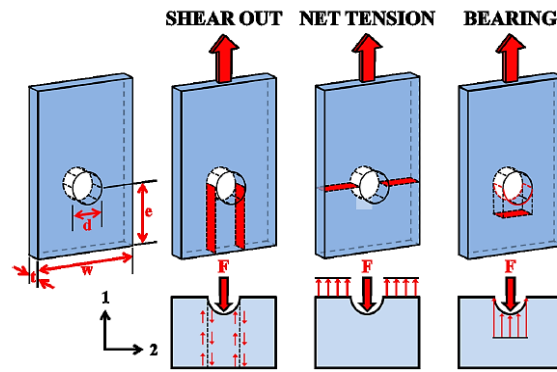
Failure modes for mechanical fastener joint [37].
